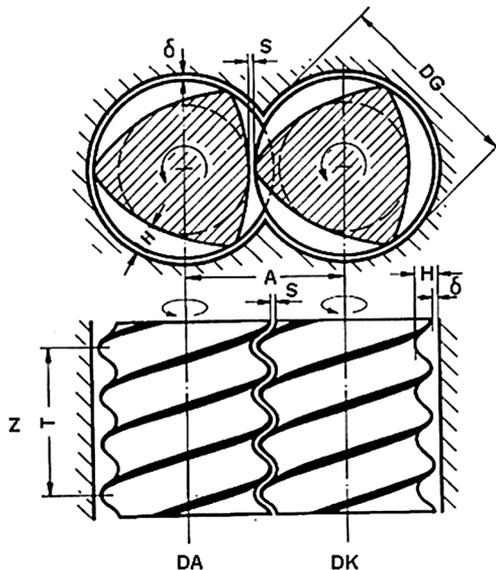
Internal geometry of the co-rotating extruder with dimensioning
